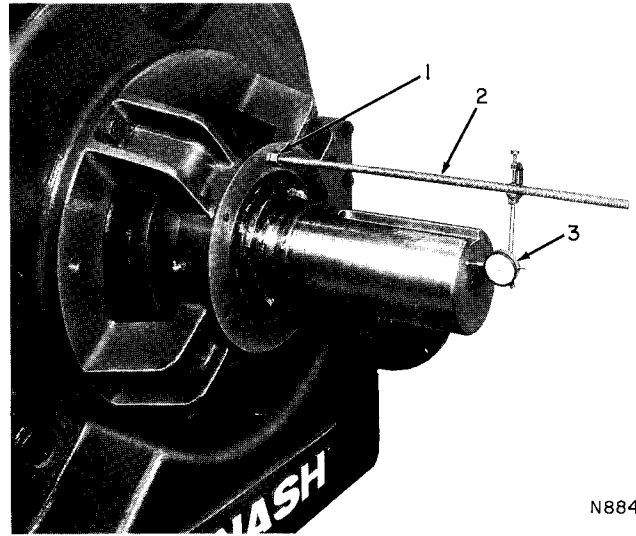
Measuring Bearing Roller-Cup Clearance. Models L, M, P, R, S & T
